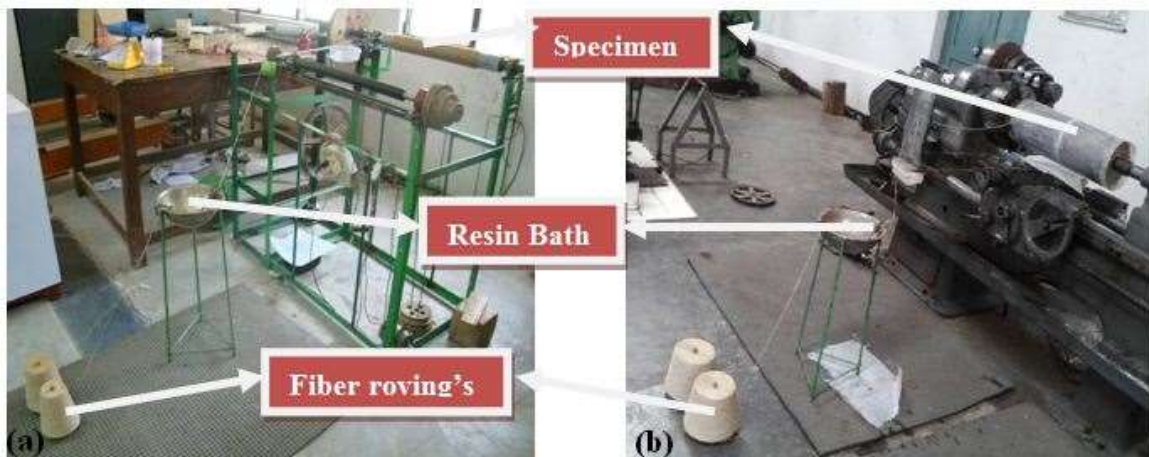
Set up for fabrication of pipes, (a) using filament winding machine, (b) using lathe.
